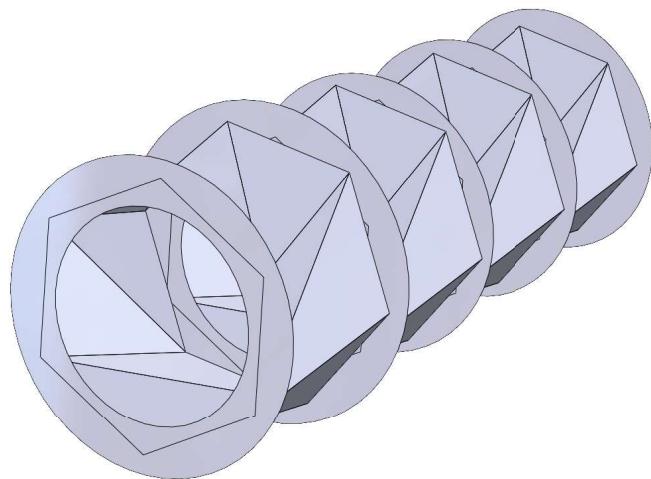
A four layered Kresling Bistable Baffle assembly, axial view
